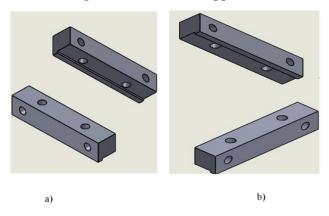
Technical Drawing of Mold Support Bars. a) Left Support Bar, b) Right Support Bar.
